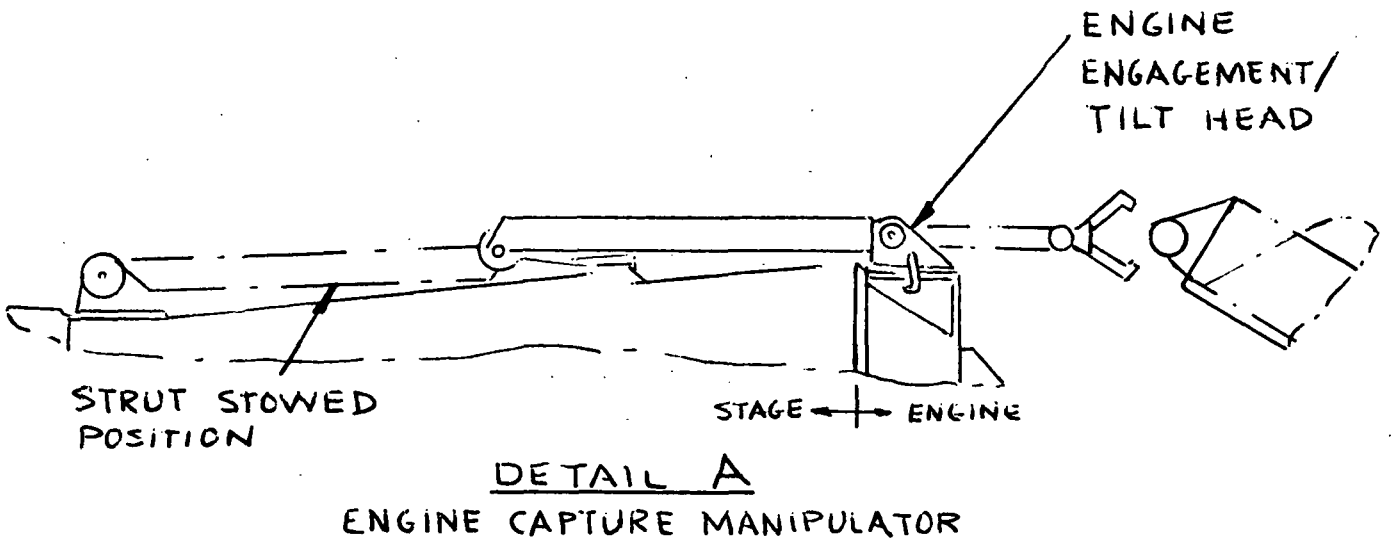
Engine Assembly Using Direct Dock/Capture Manipulator
